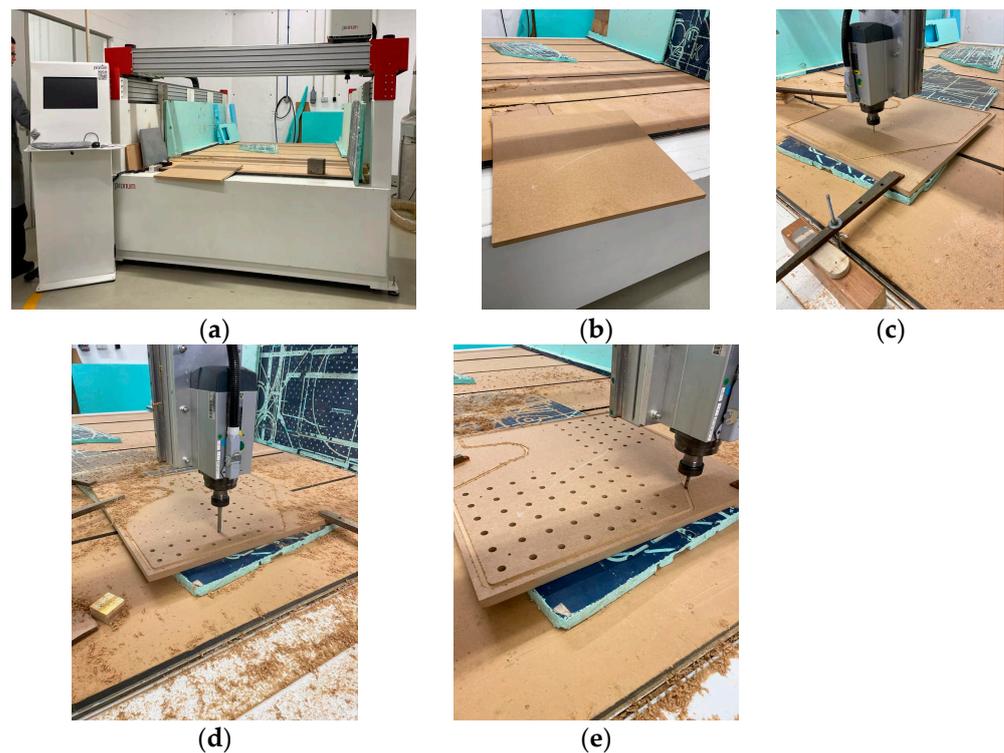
The manufacturing process of the wooden board: (a) Pronun CNC router; (b) wooden board (MDF), 650 mm × 650 mm × 18 mm; (c) drilling with a 5 mm diameter; (d) drilling with a 13 mm diameter; and (e) milling of the outer contour.
